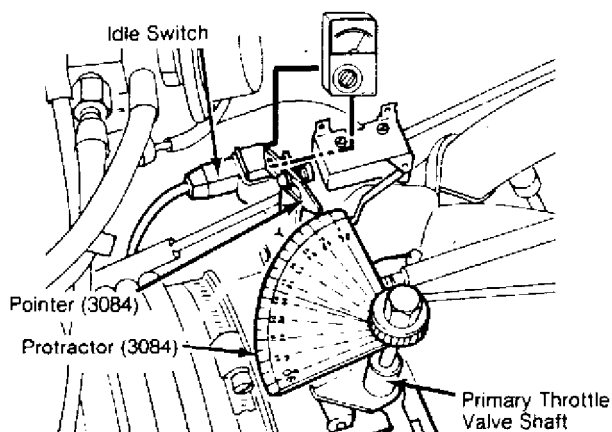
Checking Throttle Valve Idle Switch Adjustment
